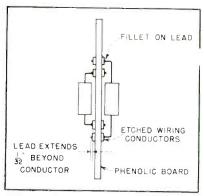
Arrangement of components for edge dip soldering, to obtain strong fillets on both sides of board
